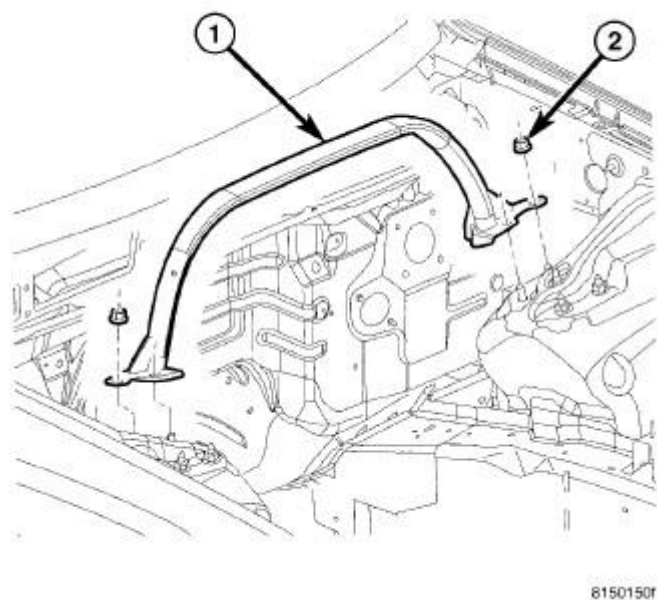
Engine CoverCourtesy of CHRYSLER LLC
